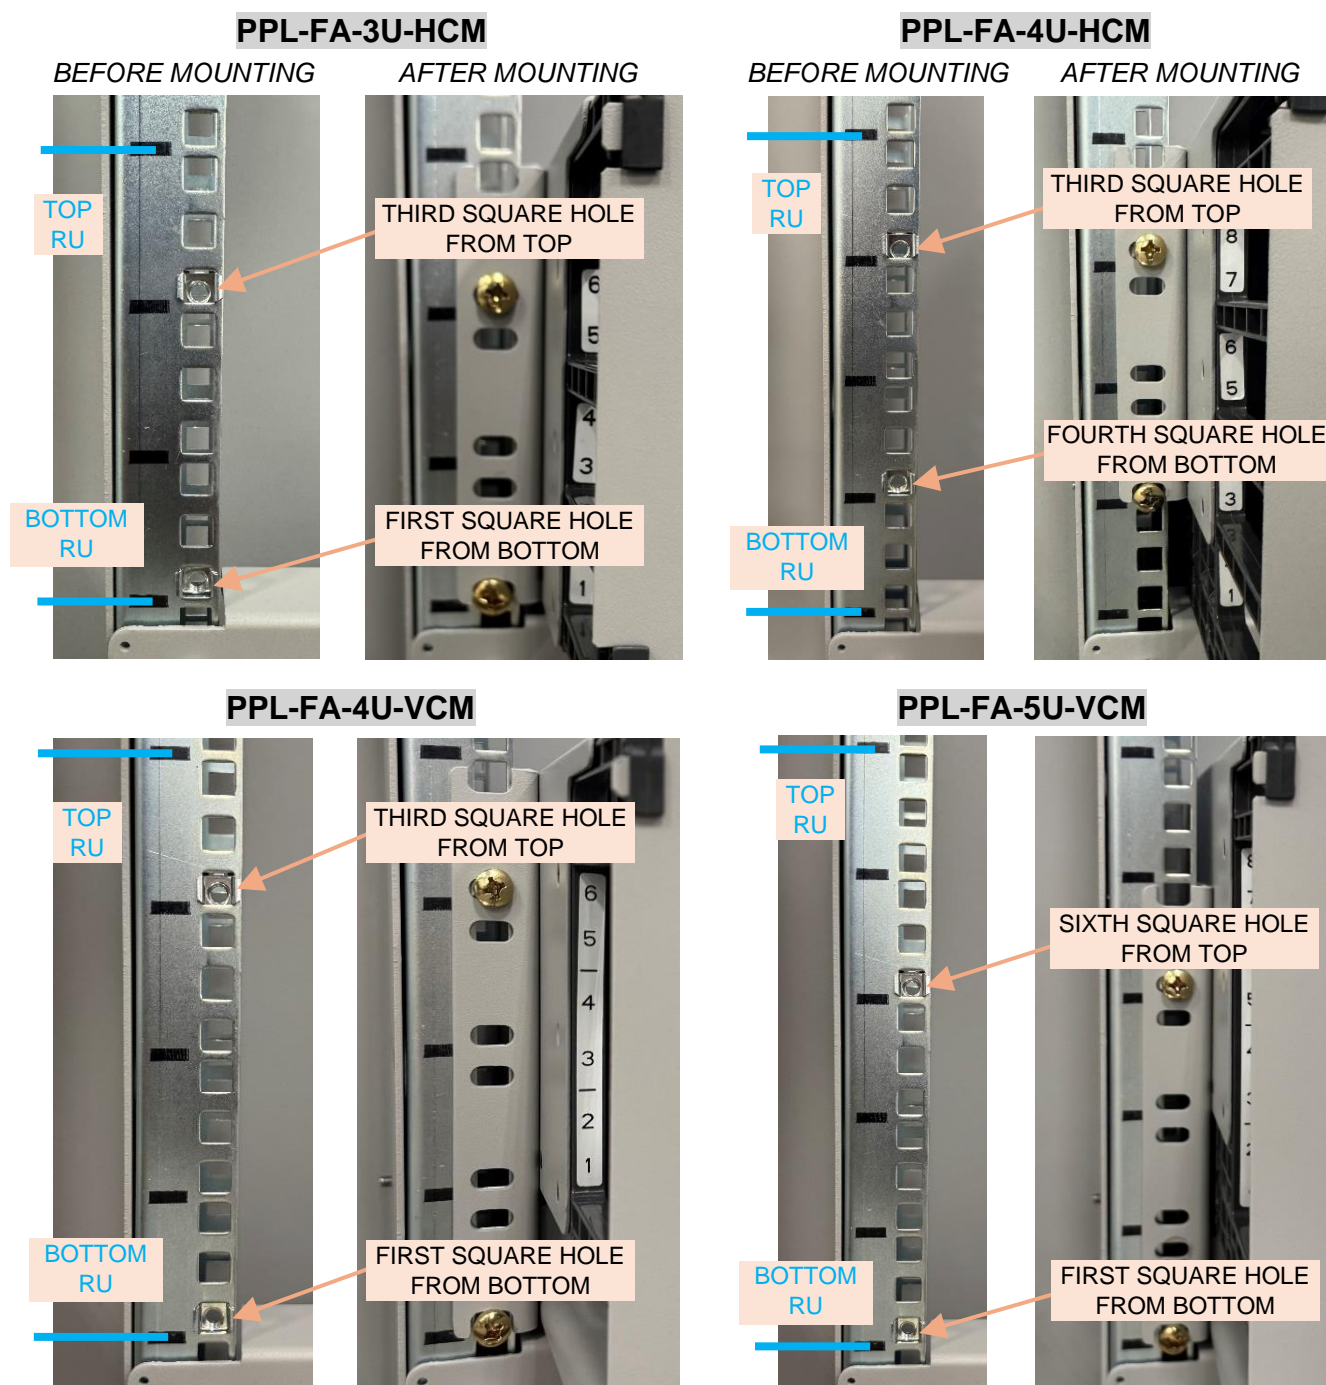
Cage Nut Locations Per Panel Type and Mounting RUs
